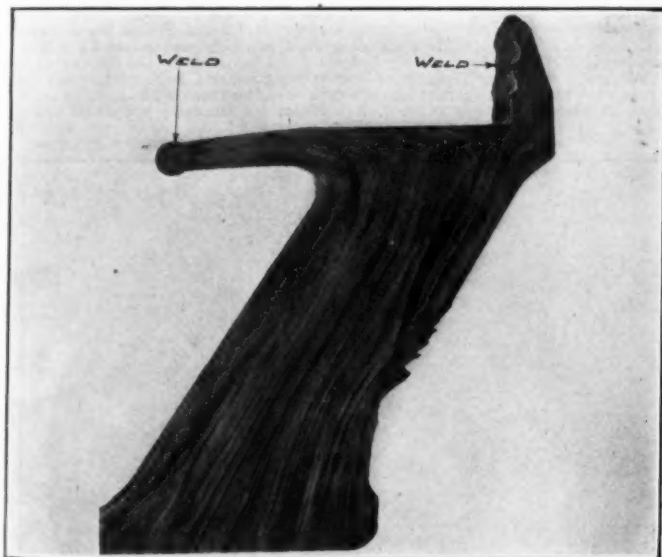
Radial Section Through a Valve Spool Follower that Was Welded By the Electric Method
